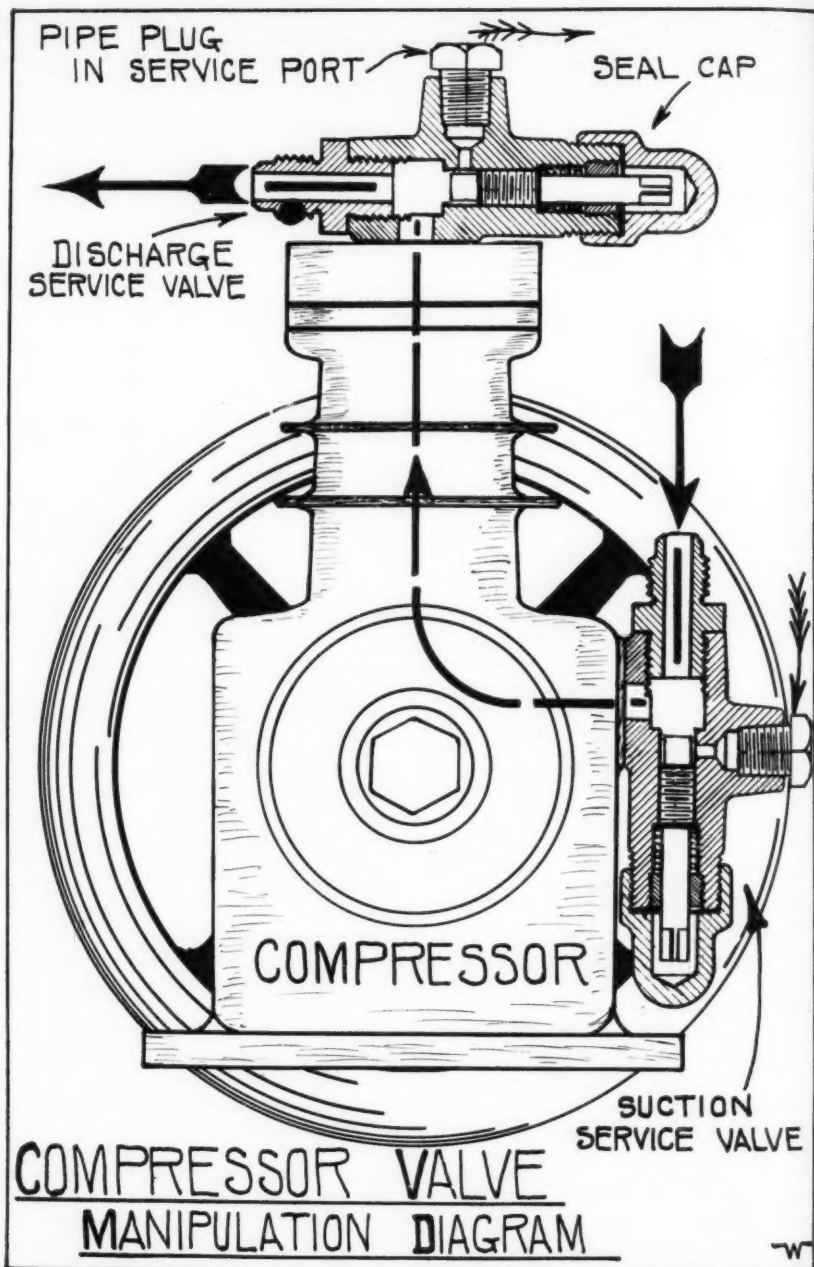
CUT OUT VALVE STEMS IN FIG. 4 AND INSERT AS SHOWN.
